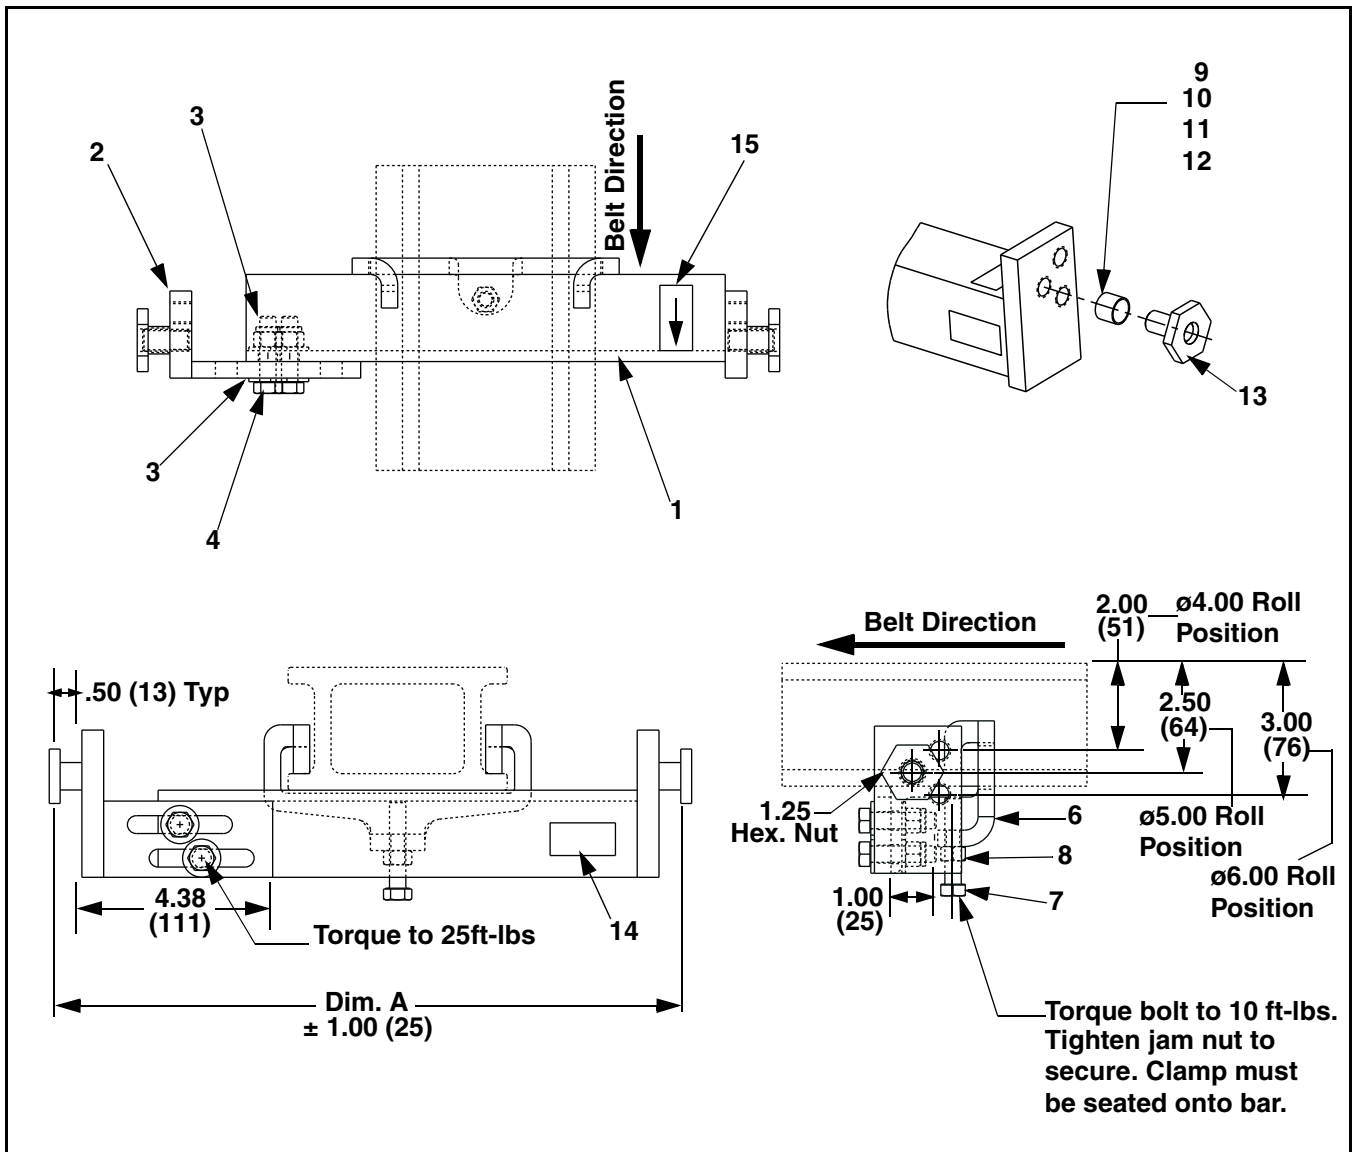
Martin® Idler Conversion Kit Assembly P/N 37135-KXX
